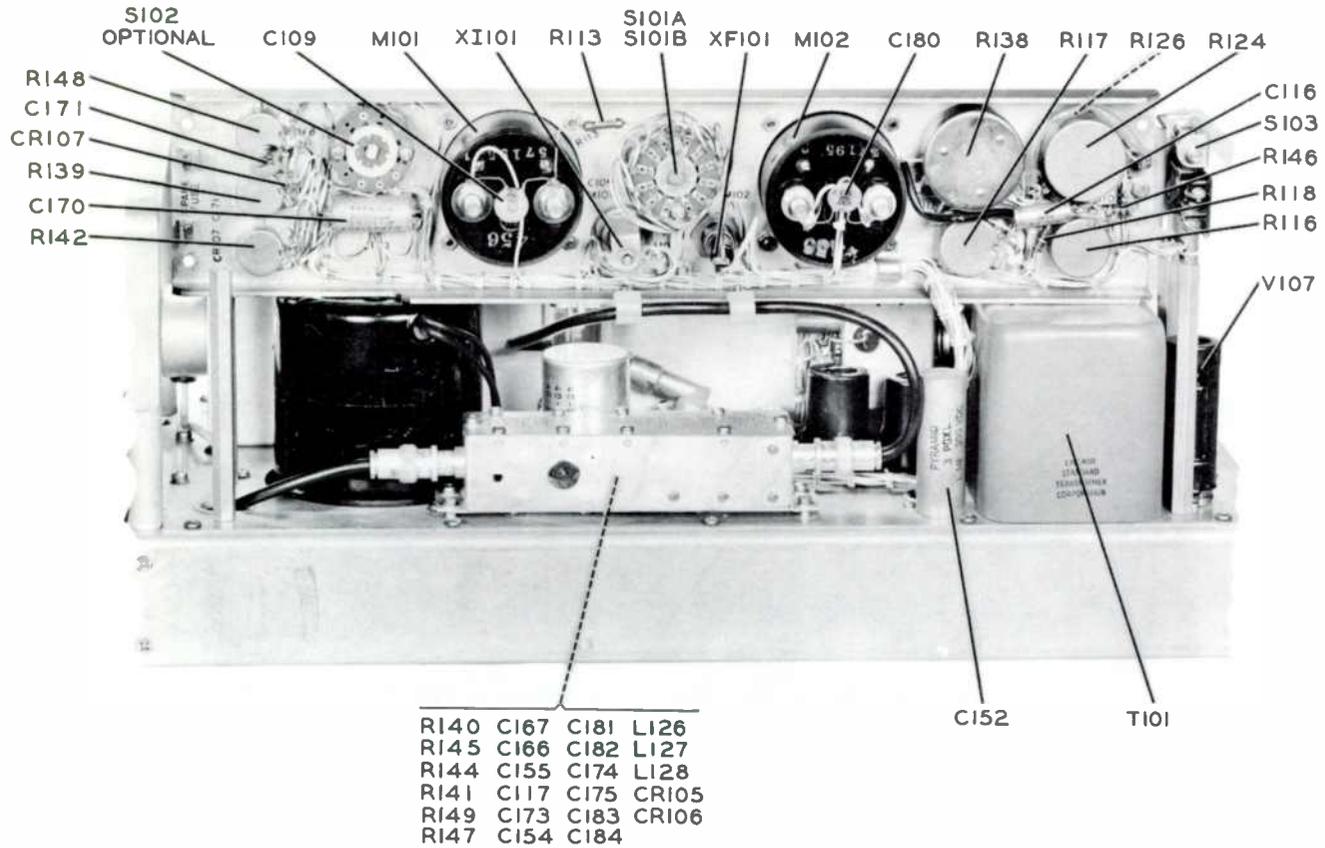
R-F Unit, Bottom View, Dust Cover Removed, Back View of Control Panel
